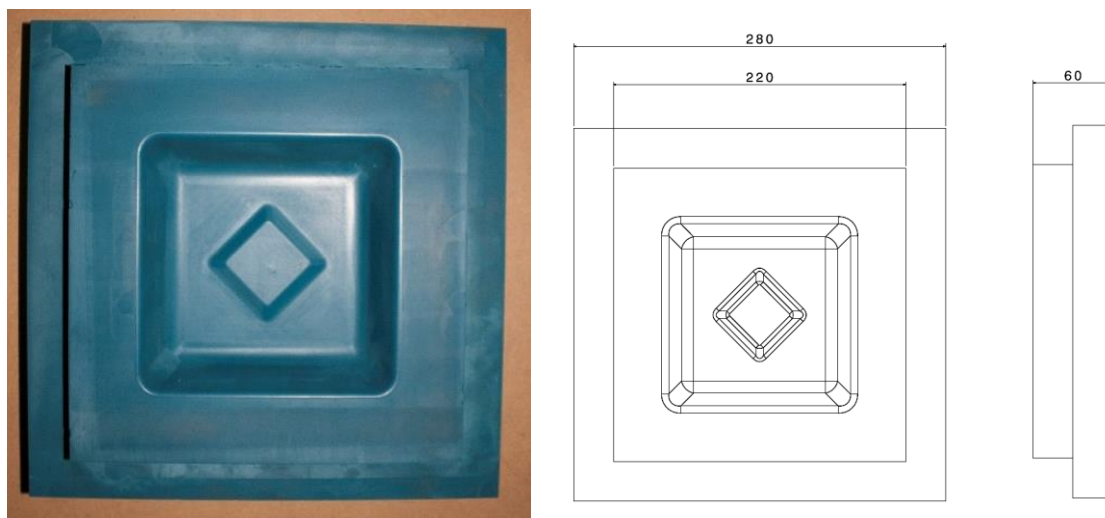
53: real view of the die (left) and main dimensions in mm (right).
